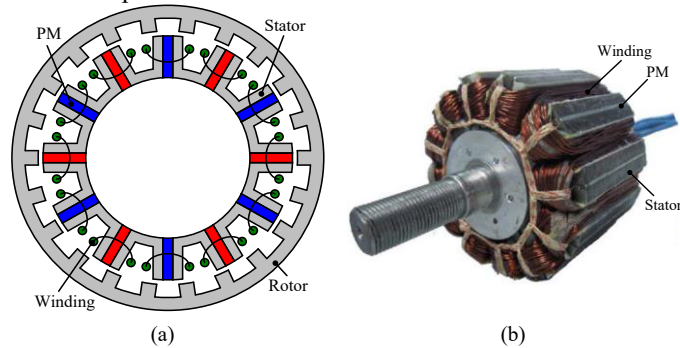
Outer rotor flux switching PM machine [65]. (a) Machine configuration. (b) Constructed stator with armature winding surrounded magnets.
